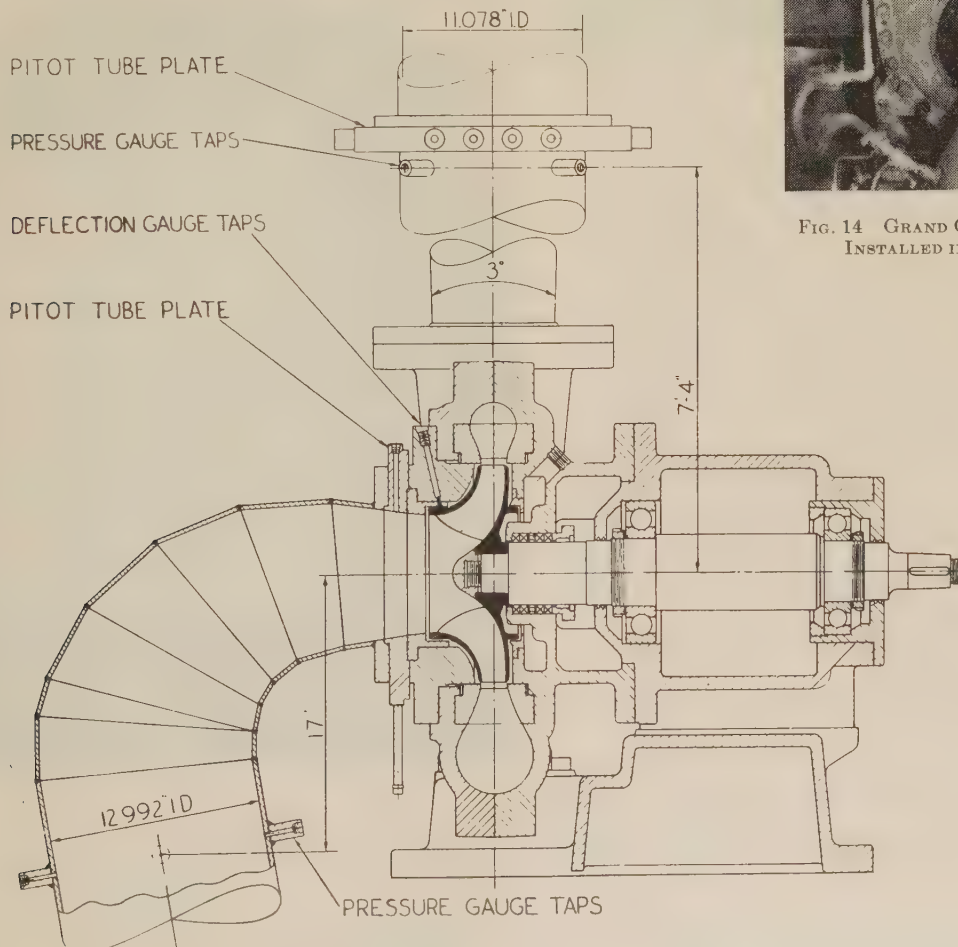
ASSEMBLY, GRAND COULEE MODEL PUMP
